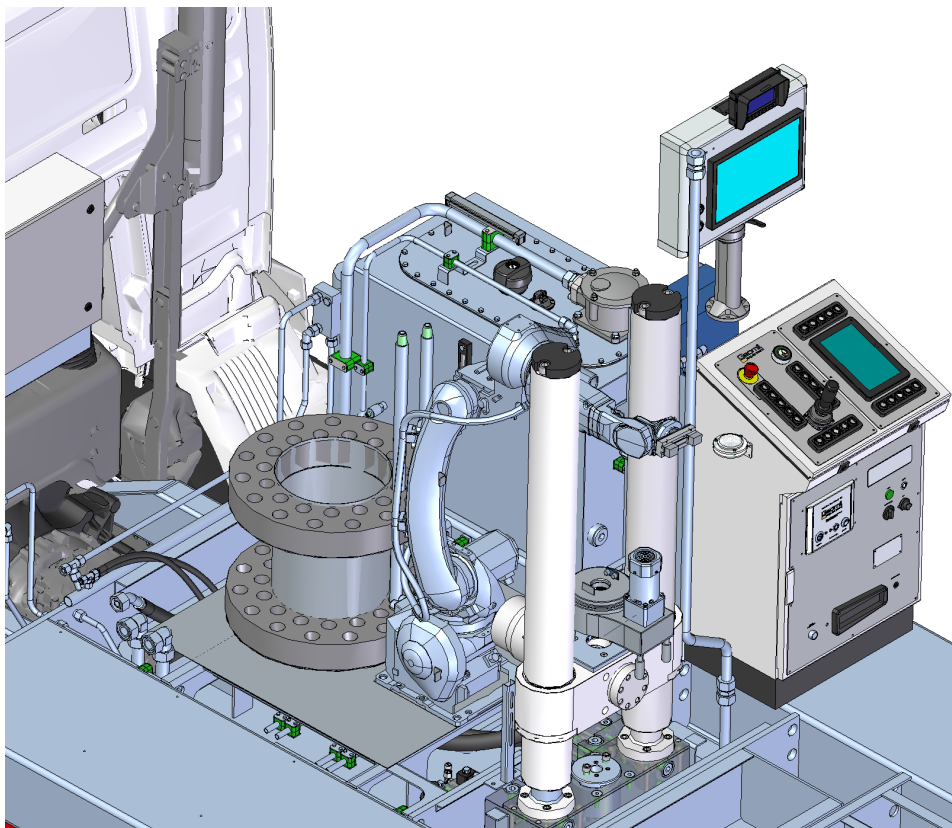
Whole System For The Automated Sounding Process Integrated In A Grizzly.
